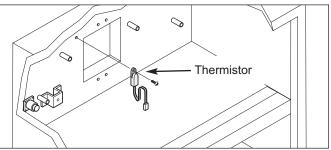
700BC/I-3 Refrigerator Thermistor
